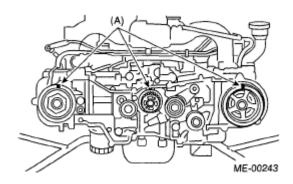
Identifying Alignment Marks On Cam Sprocket Courtesy of SUBARU OF AMERICA, INC.
